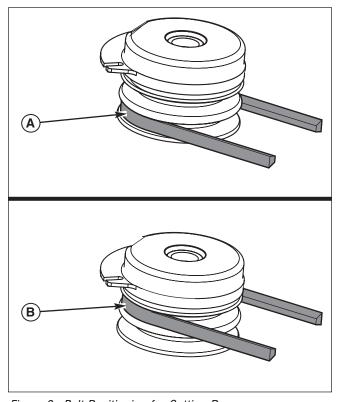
Belt Positioning for Cutting Range A. Deck Drive Belt Positioned for Lower Cutting Range B. Deck Drive Belt Positioned for Upper Cutting Range
